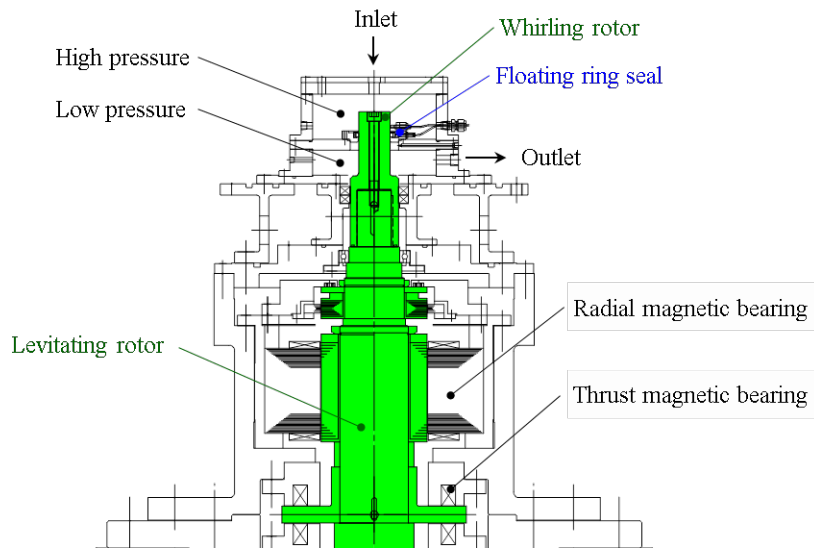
FRS test configuration of EBARTS with an active magnetic bearing
